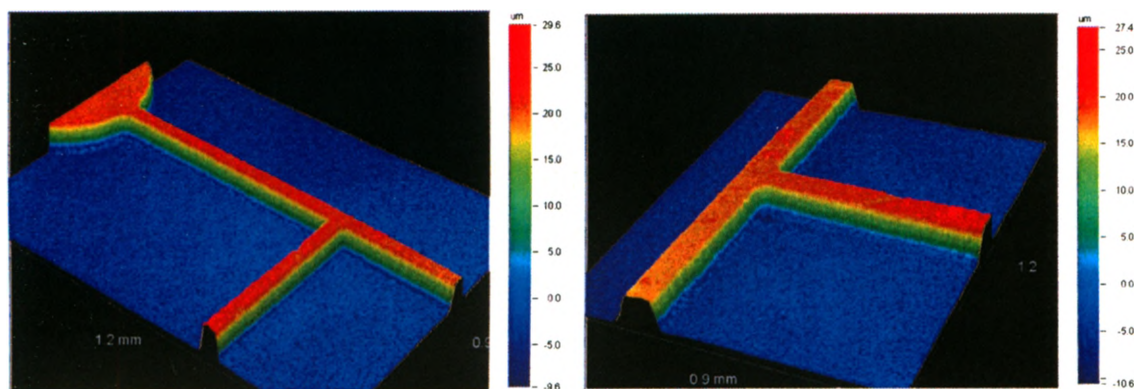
Three-dimensional measurements of the T-micromixer mold master taken by the Wyko optical surface profiler.
